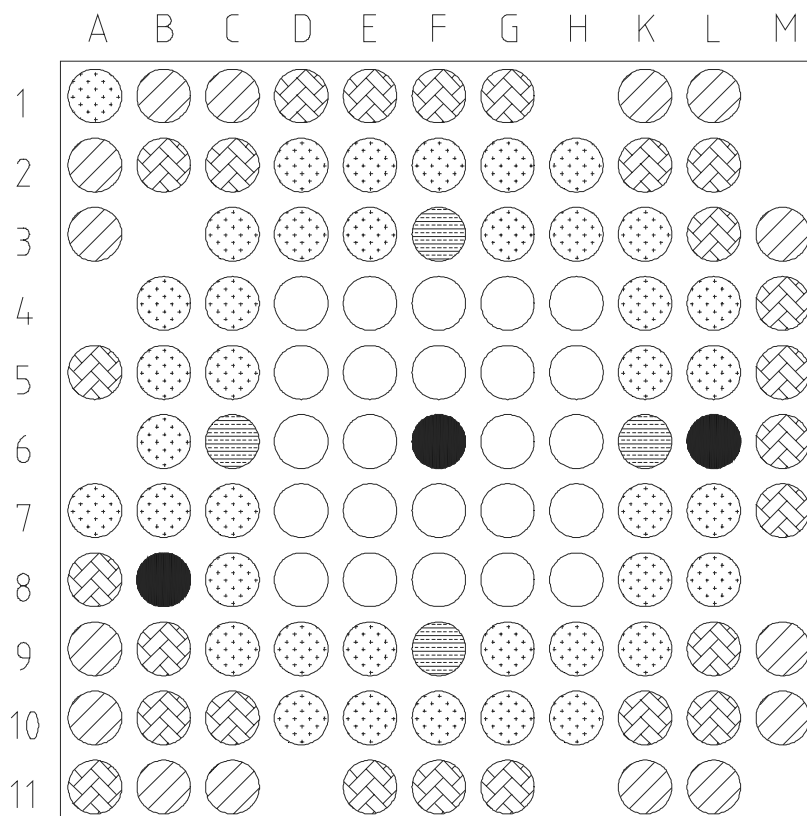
D73 Partial Assembly Array - J2 Assembly Type
